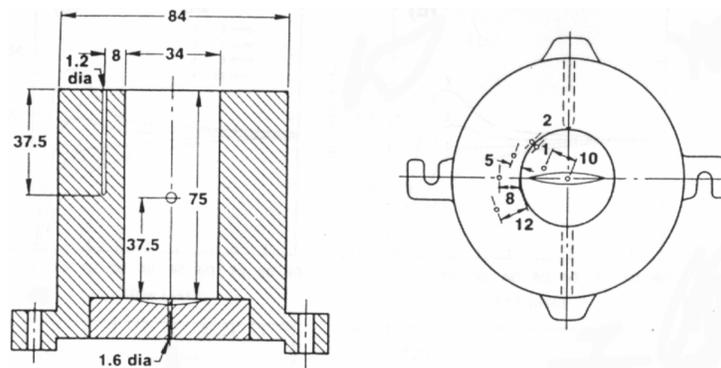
Cylindrical aluminum solidification test; geometry of the experimental apparatus and location of both thermocouple and displacement transducers
